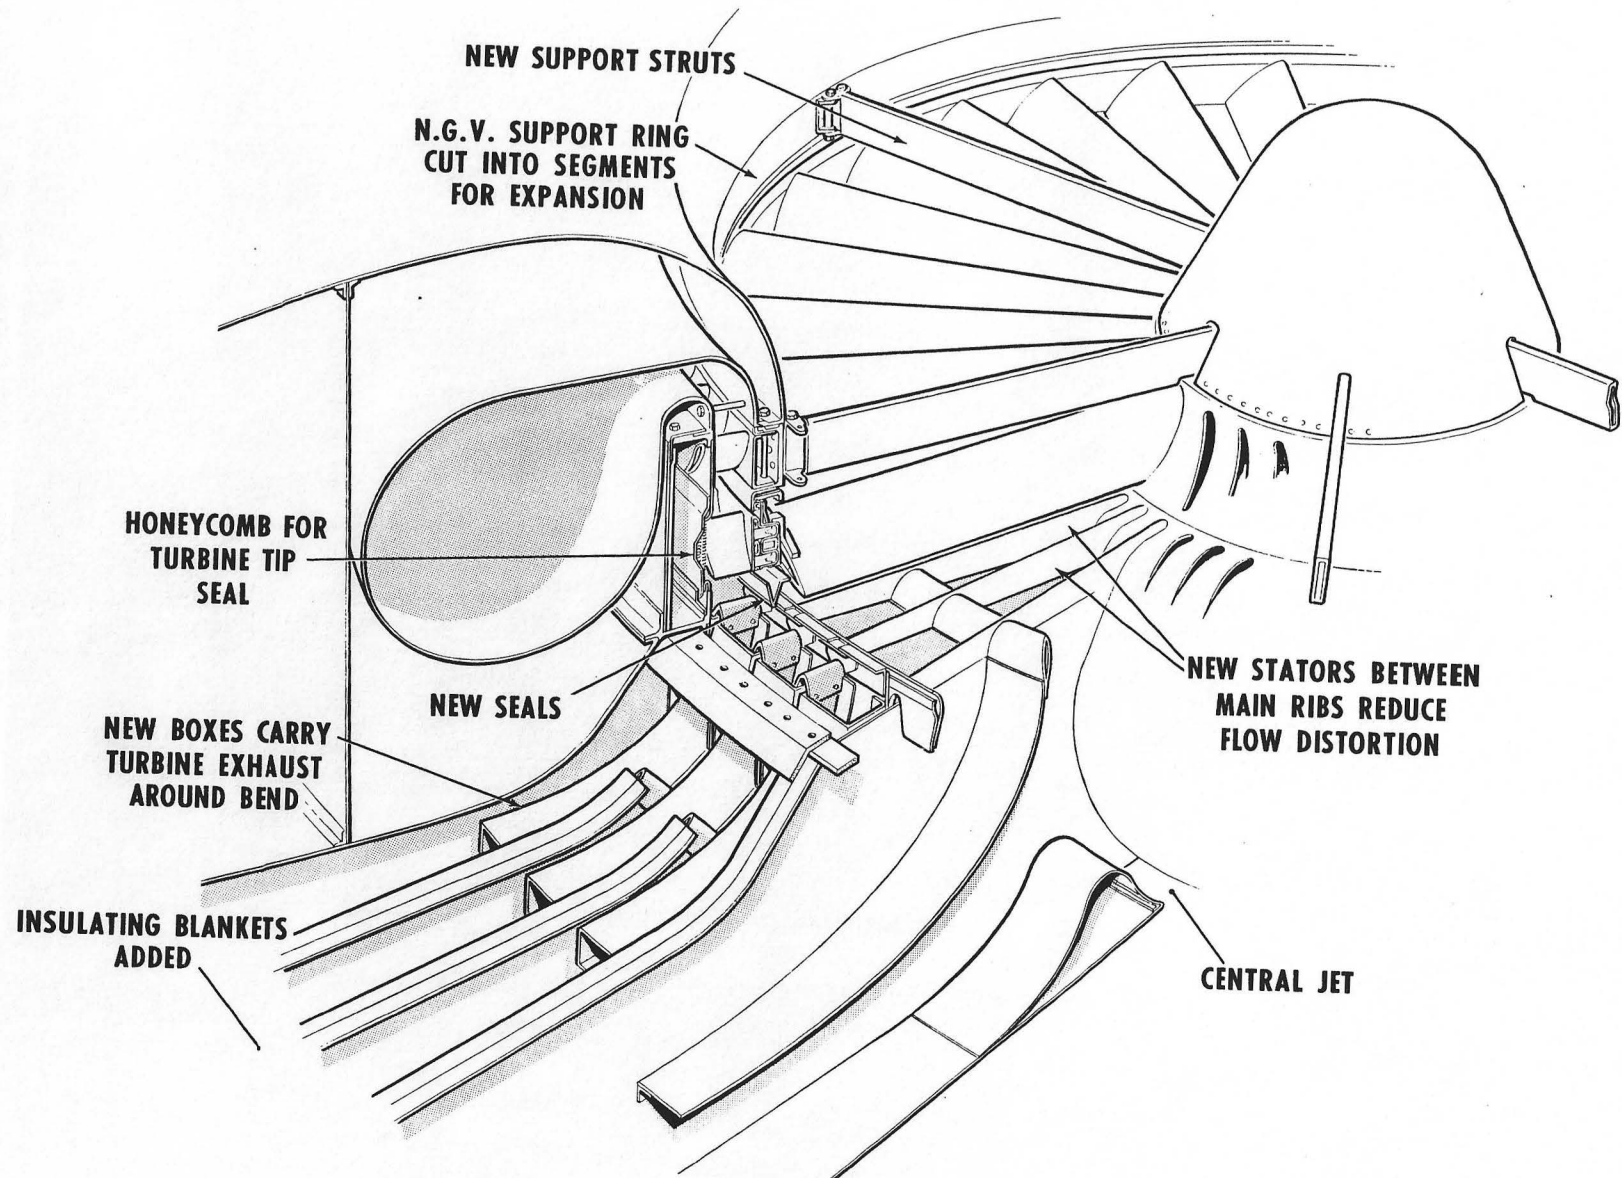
· TURBOROTOR THRUST IMPROVEMENT MODS
